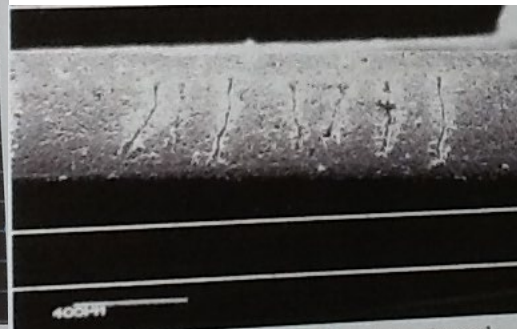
Cross section of EV boreholes through 1/2 millimeter thick aluminum oxide plate.
